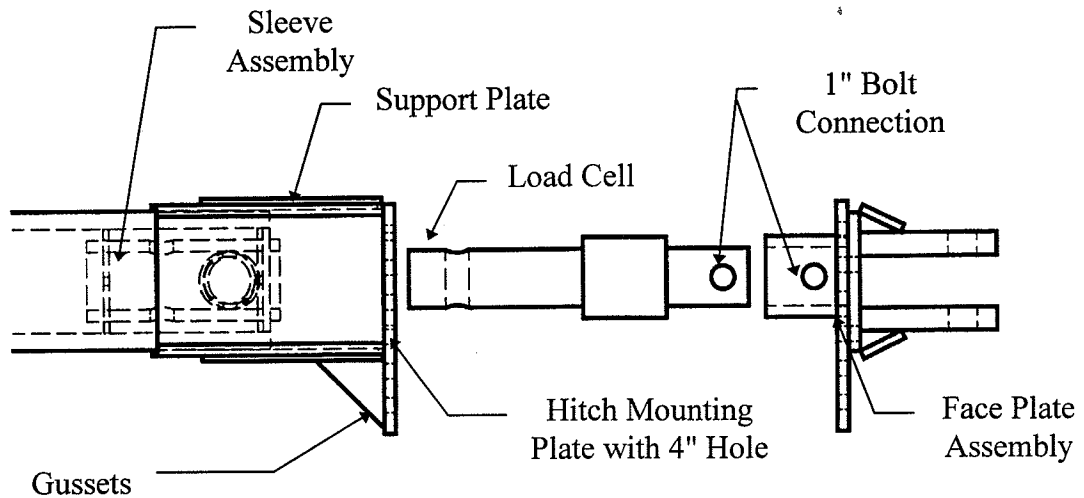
Exploded side view of the spreader's modified hitch with load cell.
